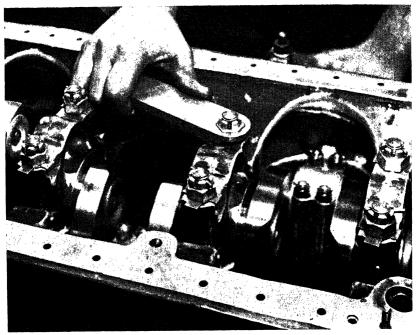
Showing special spanner which allows correct leverage for tightening main bearing nuts.
